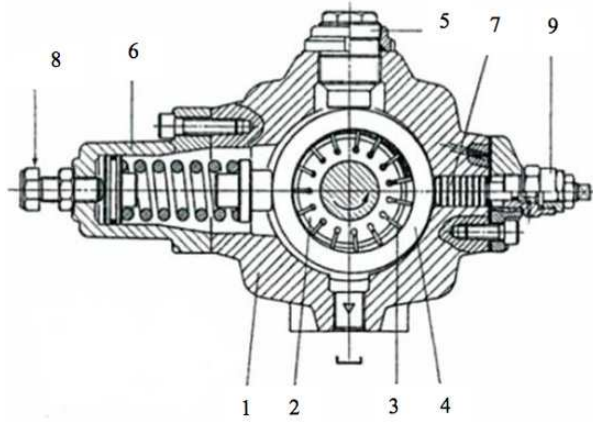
Variable displacement vane pump main components: casing (1), one piece rotor shaft (2), vane (3), pressure ring (stator) (4), balancing screw (5), control piston (6), bias piston (7), tuning screws (8, 9).
